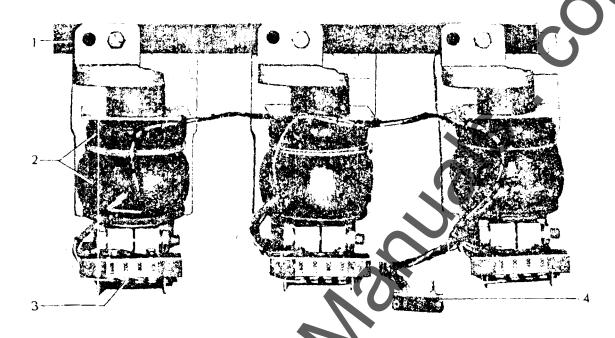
(8039647) Magnetic Coll Assembly for AK-3-50 Breakers
